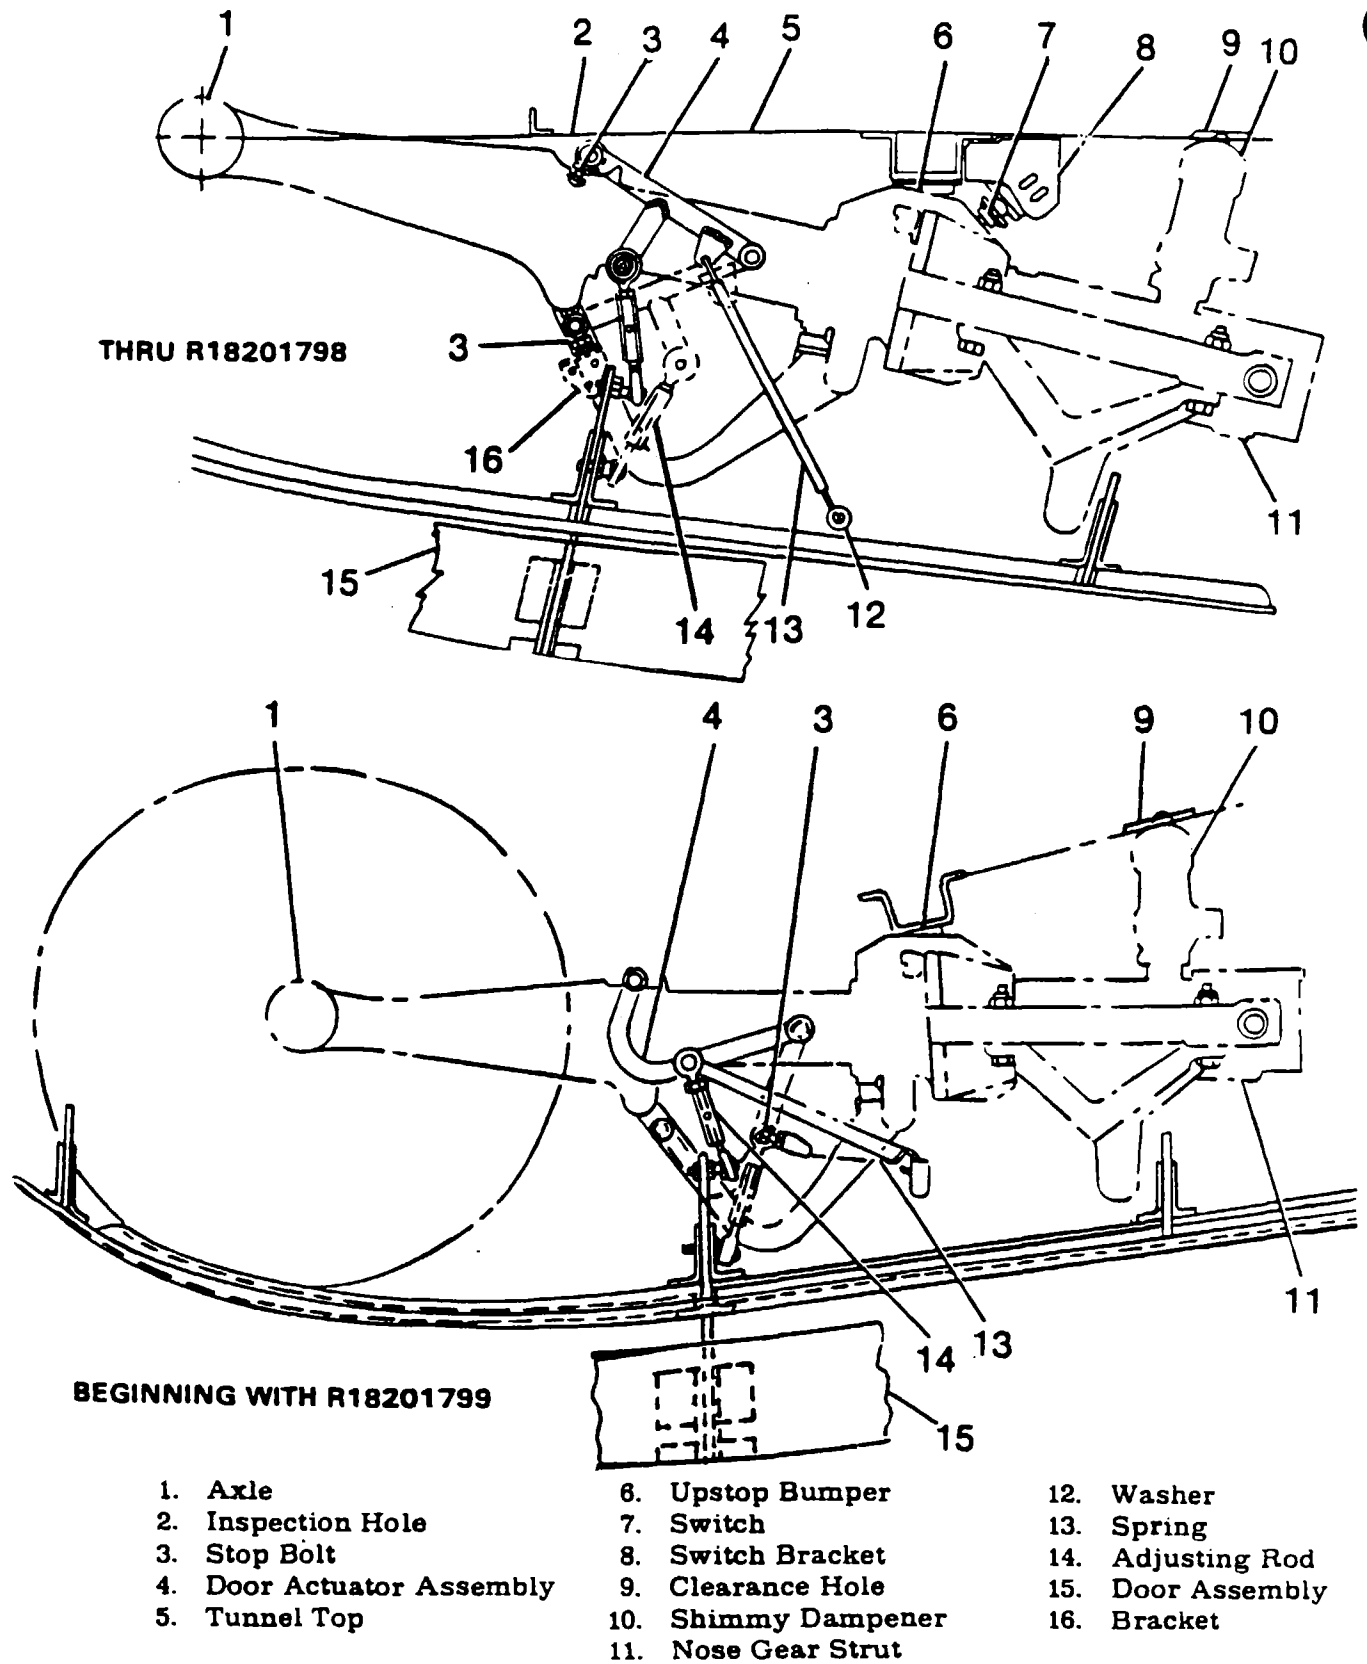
Nose Gear Rigging (Sheet 1 of 3)
